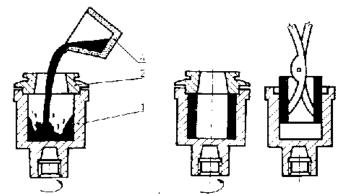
Centrifugal casting with vertical rotating axis 1- metal mould, 2- lid, 4- ladle
